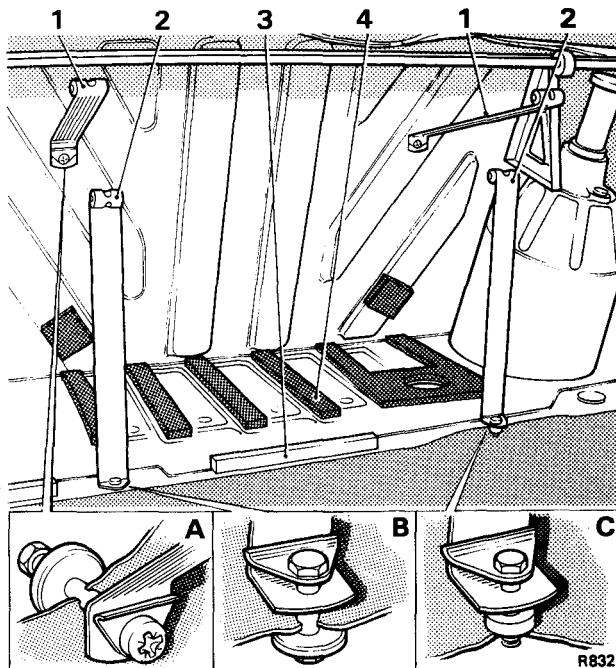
LUGGAGE COMPARTMENT - FUEL TANK FITTINGS
